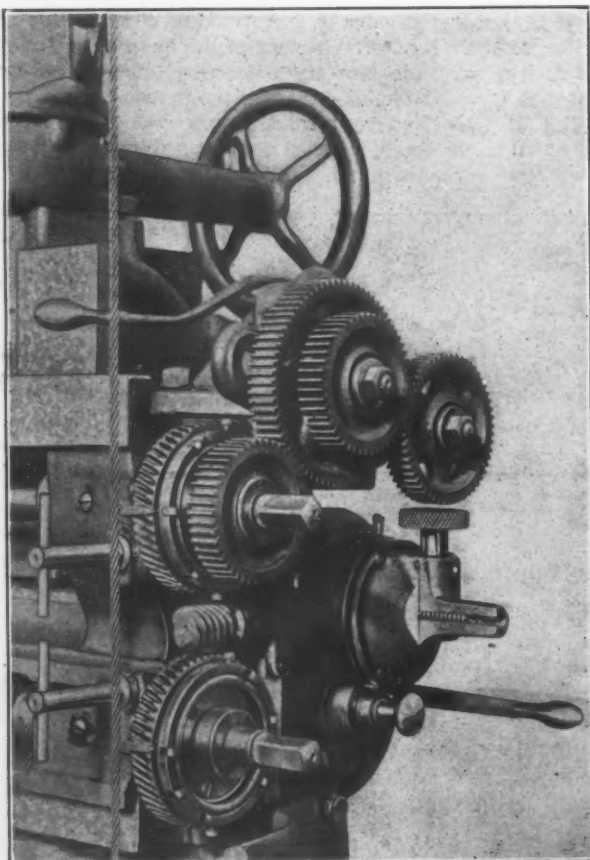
Detail of the Thread-Cutting Attachment; Also Shows Indicator Clips.
